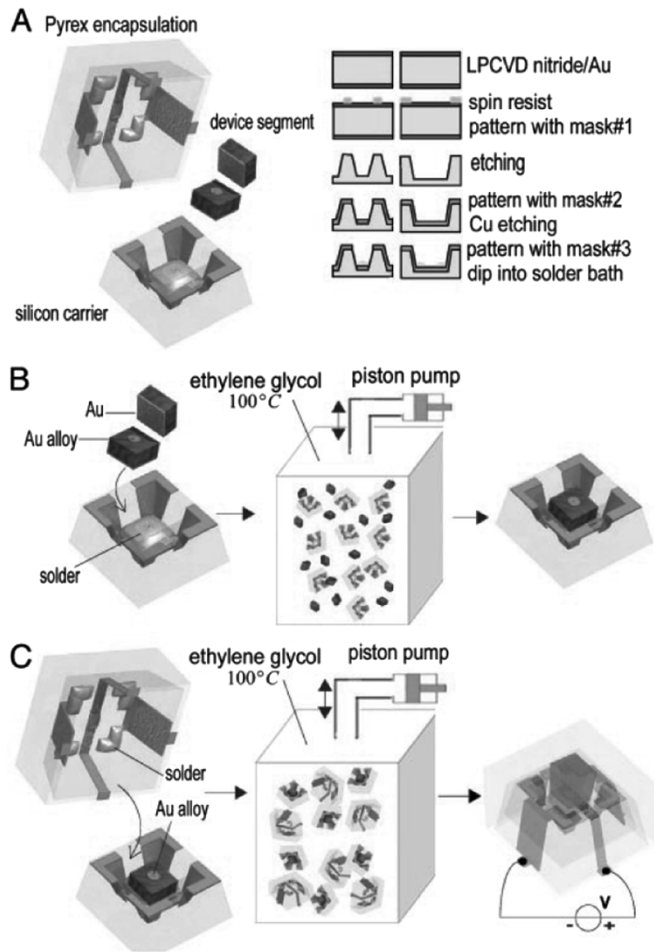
Sequential shape-and-solder-directed self-assembly is used to package AlGaInP/GaAs LEDs. (a) Surface micromachining defines silicon carrier and encapsulation units. (b) Assembly of LED device to silicon carrier. (c) Encapsulation of units (from [28]).
